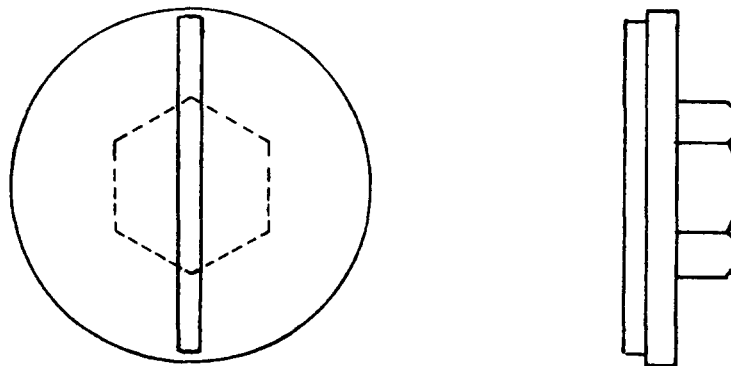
Special Tool for Installation and Removal of Slotted Round Head Humidity Indicator Plug
